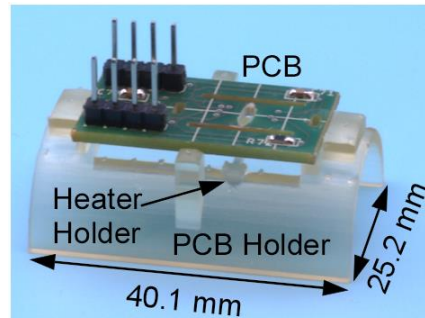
Assembled Test PCB for SM2 on PCB Holder.
